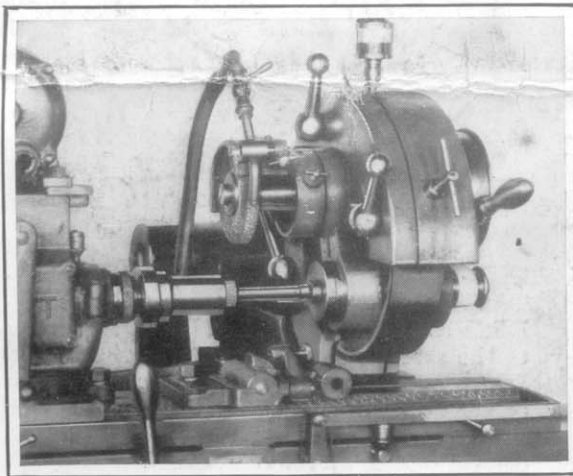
Turret Attachment with Internal Grinding Spindle in grinding position
